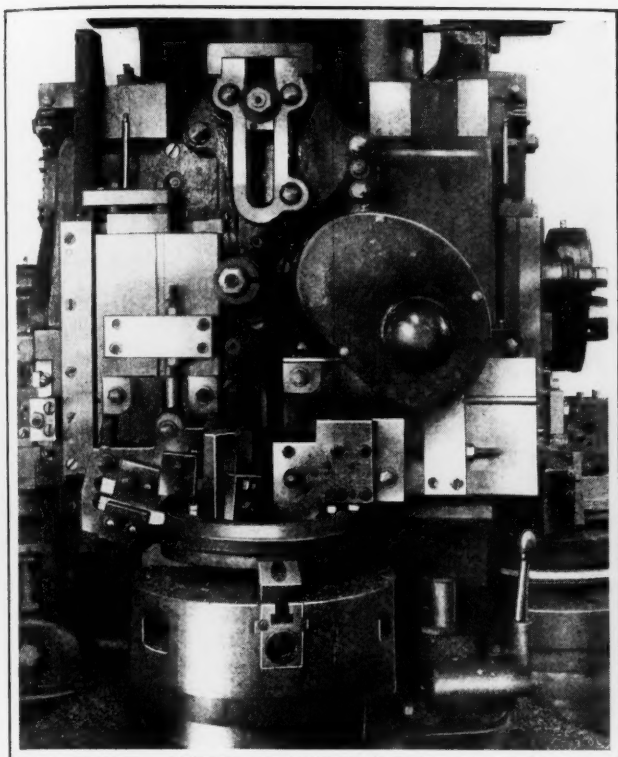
First Unit of Continuous Machine—roughing the Clutch Side
